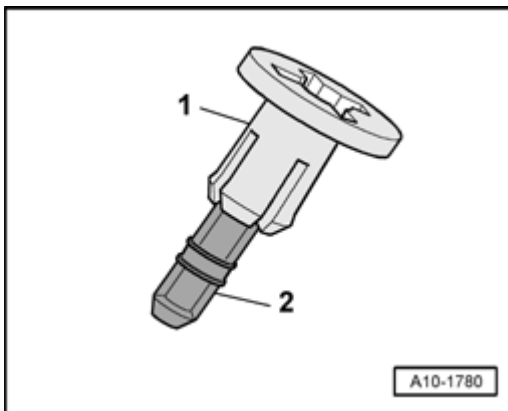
Identifying Fasteners At Lock Carrier & Pin
